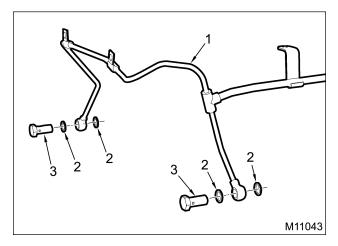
Injector return tube assembly, bonded seal washers, and banjo bolts
